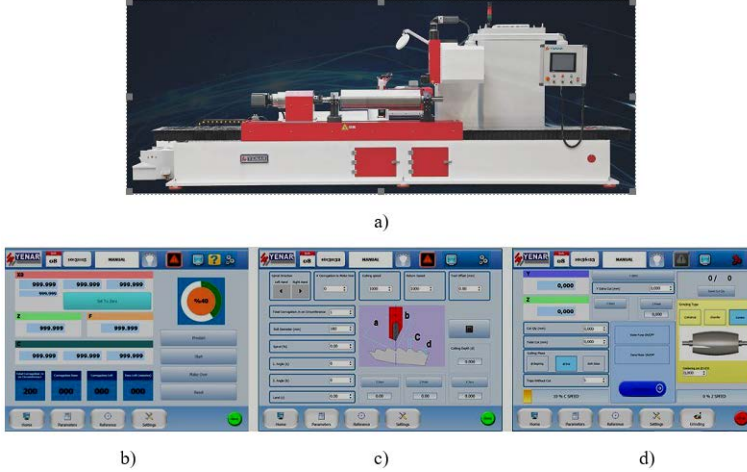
YFG3545 fluting and grinding machine; a) General view, b) Homepage, c) Fluting parameter sheet, d) Grinding parameter sheet.
